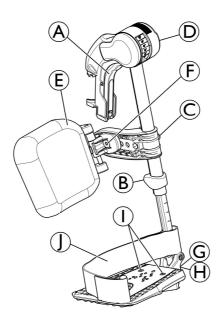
Adjusting Elevating Legrest Height and Calf pad Height/Depth
